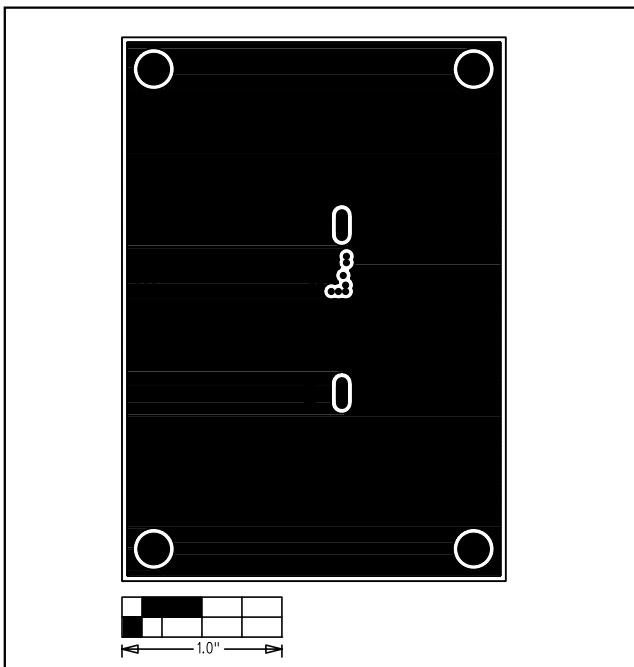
MAX9382 EV Kit PC Board Layout—Inner Layer 2 (GND Layer)
